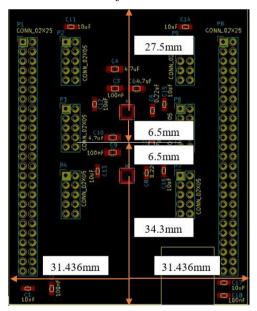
Top Layer of the cape PCB for the low density MSCS version
